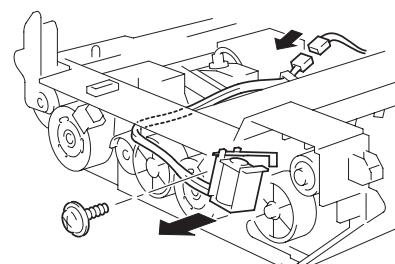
Removing the Duplex Unit Skew Correction Solenoid
